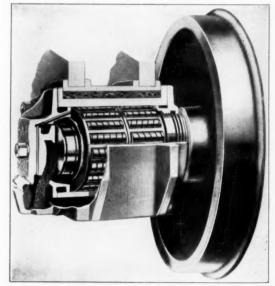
Showing details of the Fafnir Melcher type of roller bearing, applied to steam railway journal service.
